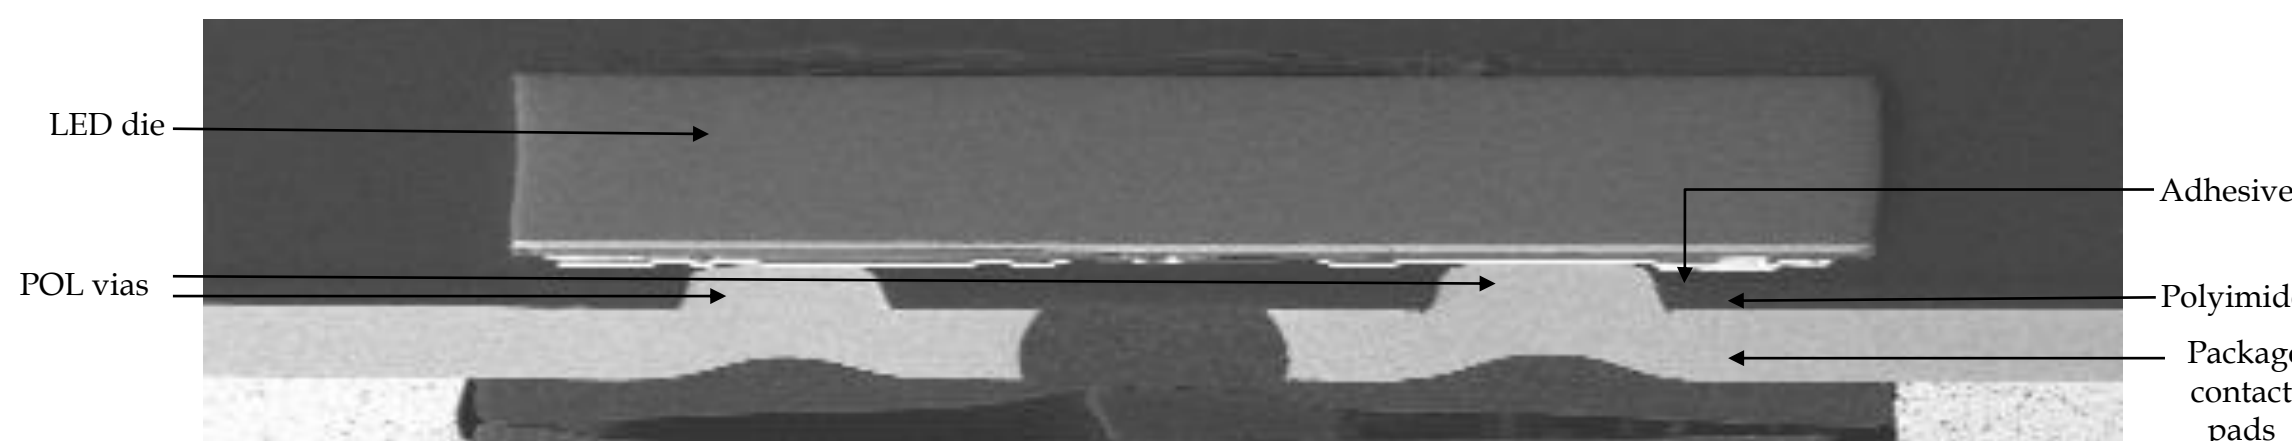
SEM image of the cross-section of the LED prototype manufactured using POL – kw packaging technology
